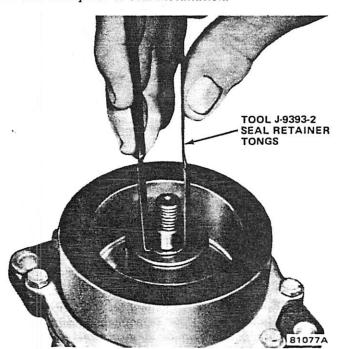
E-22 Removing Shaft Seal Seat using Tongs
